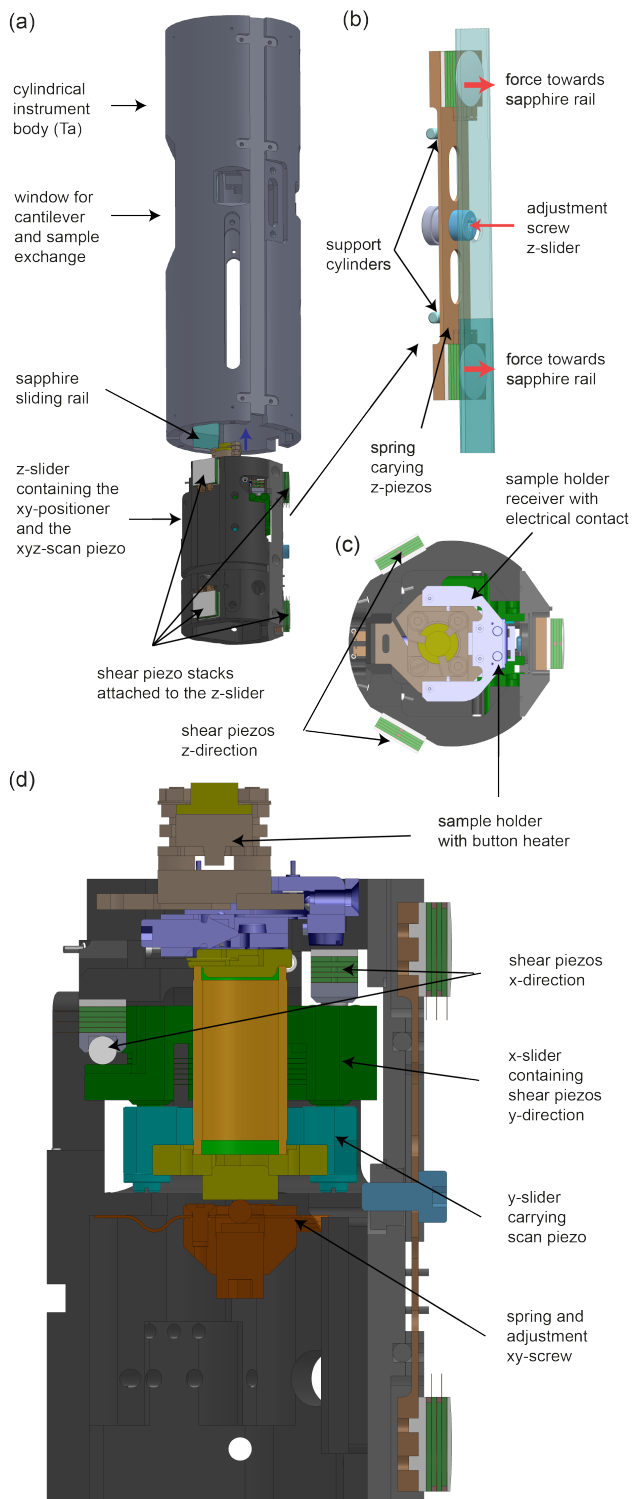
CAD drawings of the cylindrical body tube (a) and the leaf spring (b) carrying two of the total of six z-piezo shear stacks. The top and the cross-sectional views of the z-slider unit are shown in (c) and (d), respectively. The z-positioning unit also contains the xy-positioning unit and the xyz-scan tube carrying the sample holder receiver with the sample holder.
